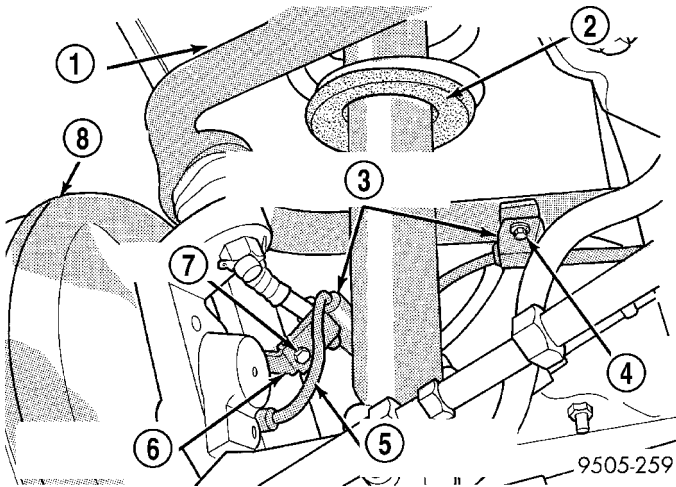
Speed Sensor Cable Attachment To Control Arm
